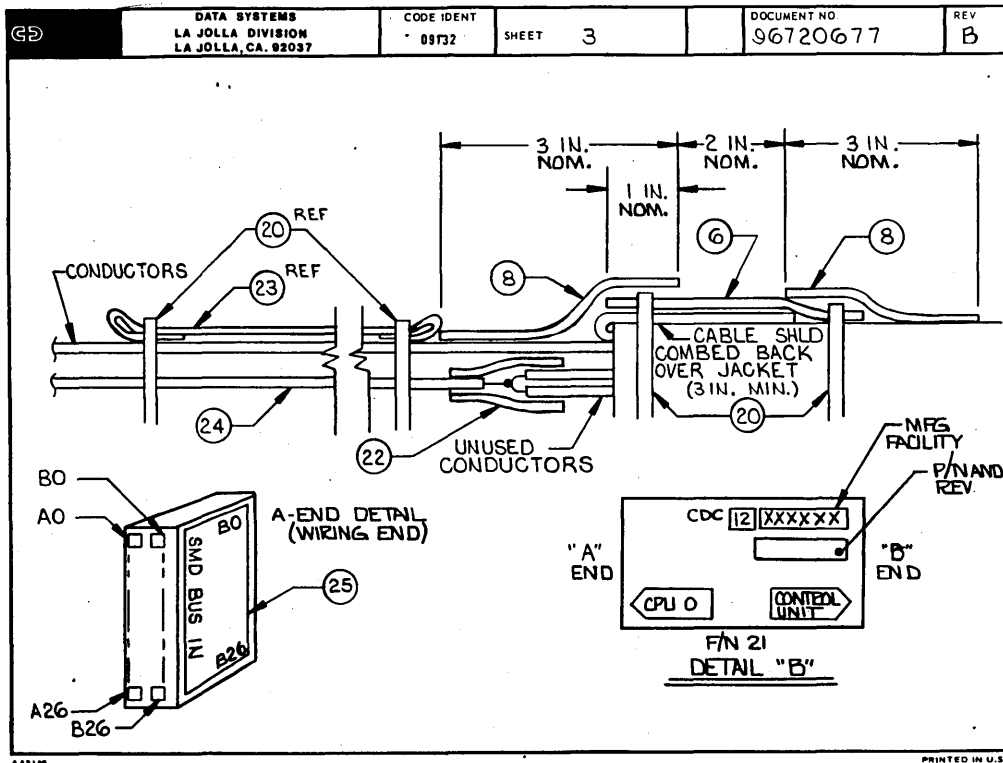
Cable Assembly - Module Drive Bus In (Sheet 1 of 4)
